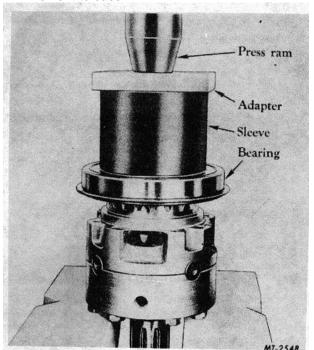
Pressing Rear Bearing Onto Inter-Axle Differential Case.
